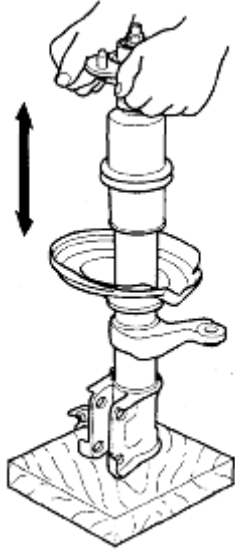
Compressing Damper Assembly By Hand And Checking Smooth Operation
